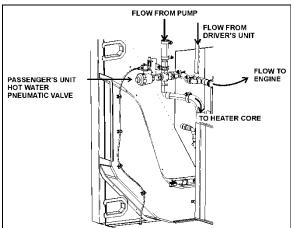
PASSENGER'S UNIT PNEUMATIC HOT WATER VALVE ASSEMBLY
